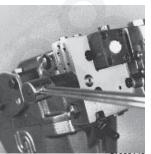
Torque Servo Pressure Supply Shuttle Spool Supply Spool Plug
